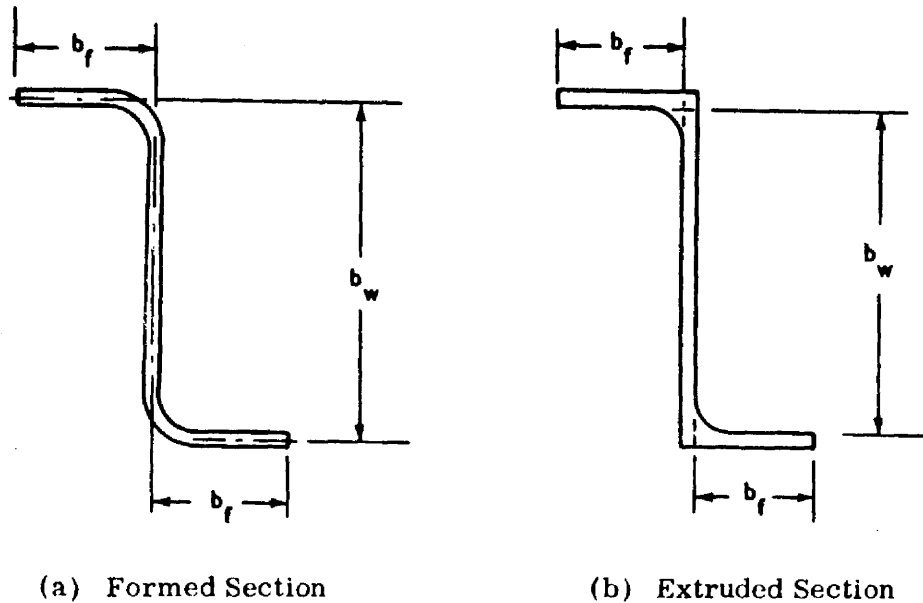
TYPICAL DIMENSION FOR FORMED AND EXTRUDED STIFFENERS.
